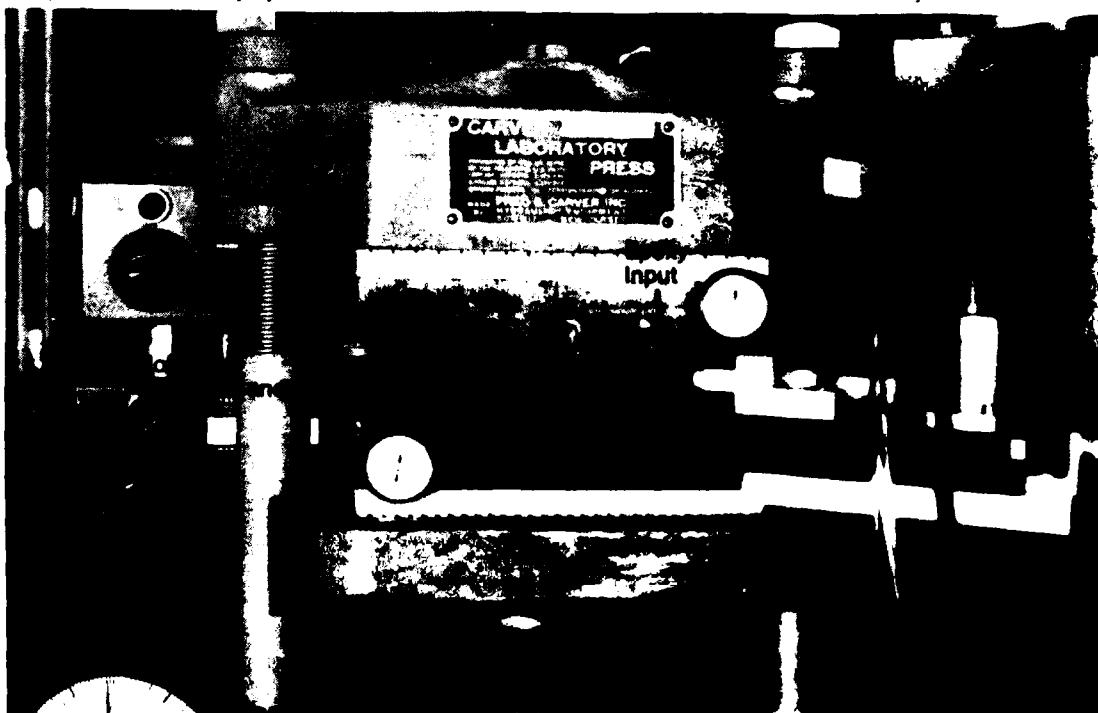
Liquid Injection Molding is Performed at 150°C and Low Pressure with this Equipment
